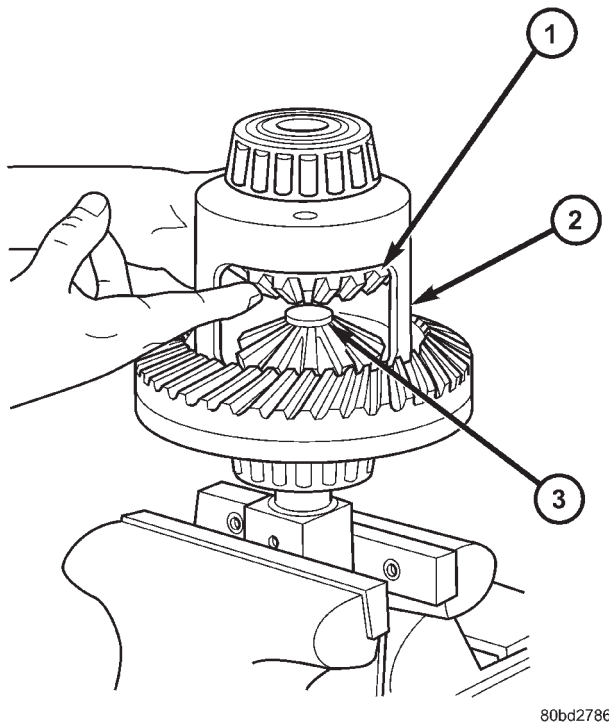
CLUTCH PACK AND LOWER SIDE GEAR
